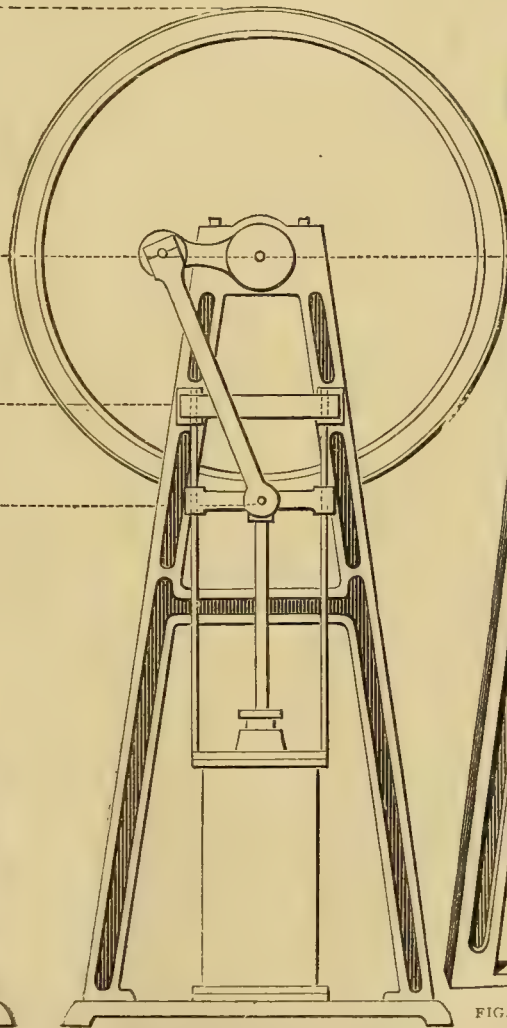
WORKING DRAWING—FRONT VIEW.
